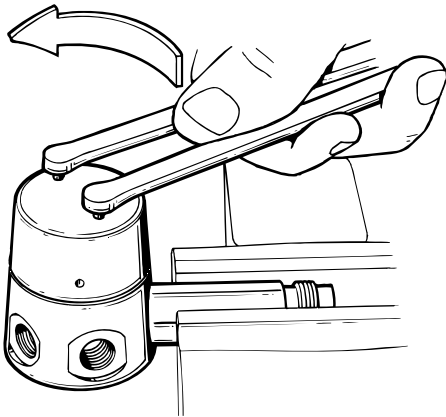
Loosening piston cap w/ Adjustable Face Spanner
